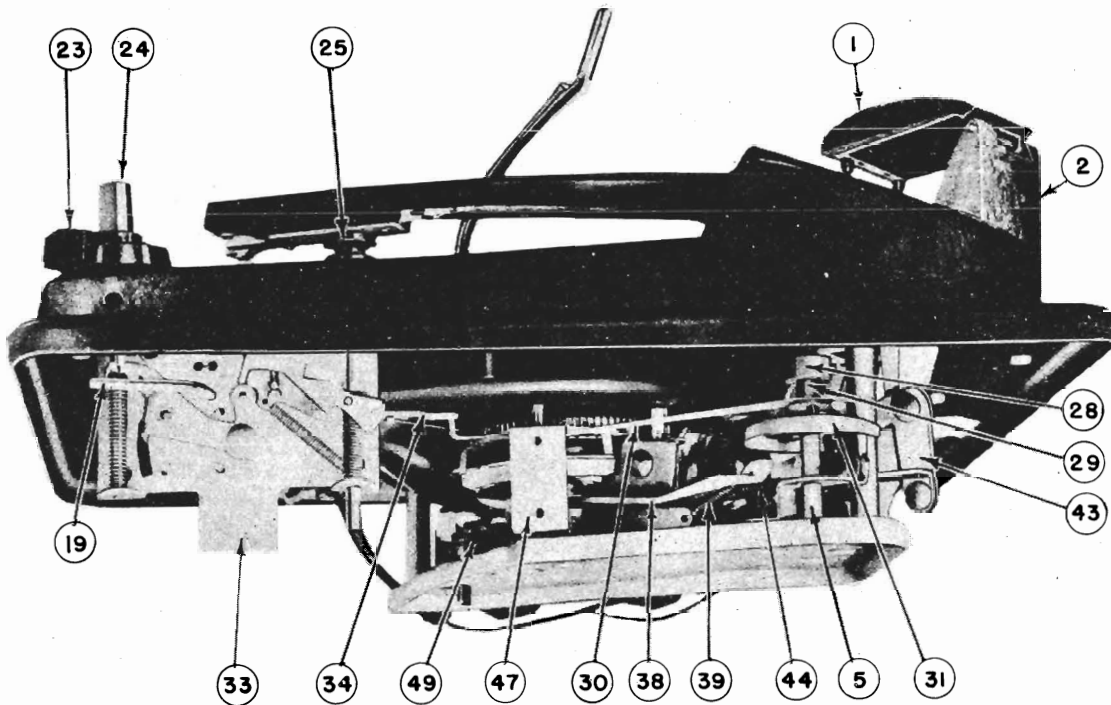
PARTS LOCATION -- RIGHT SIDE VIEW
